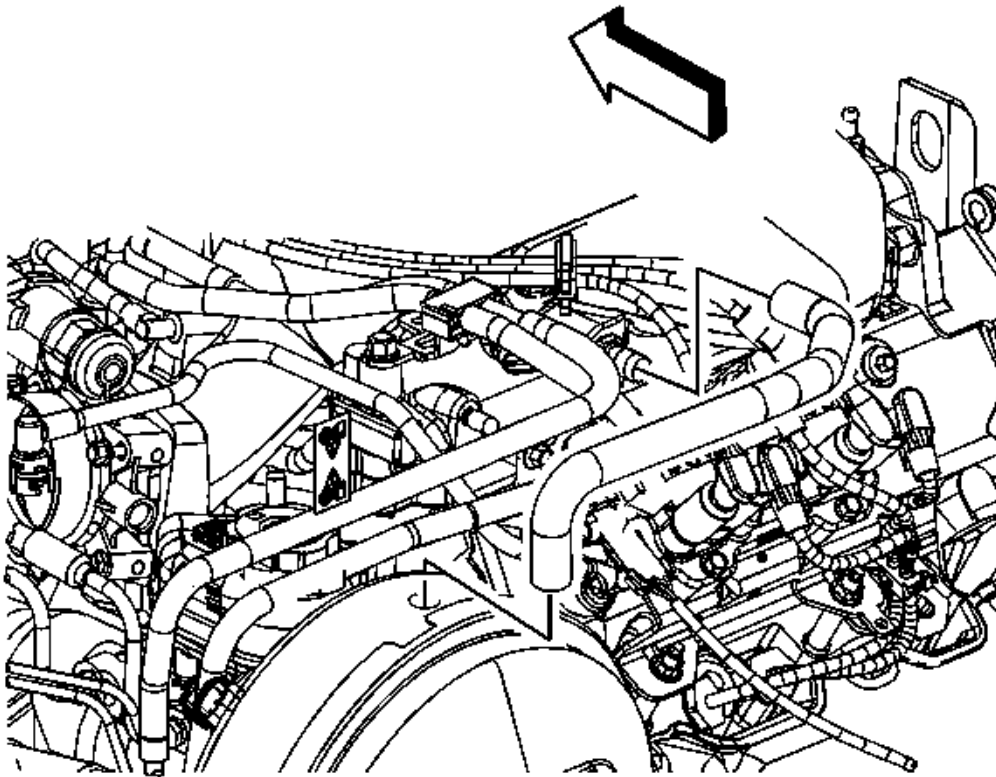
View Of Brake Booster Vacuum Hose & Intake Manifold Fitting
